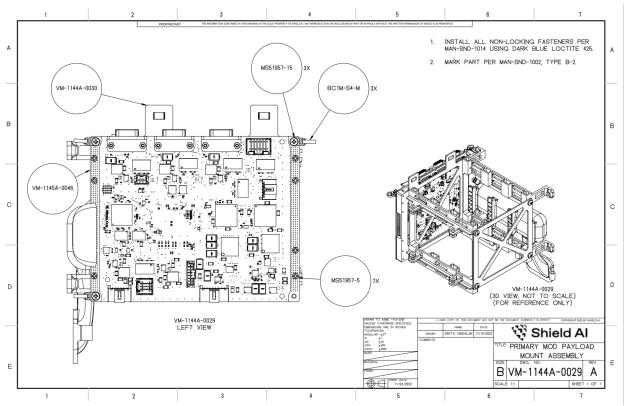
V-BAT Primary Mount Assembly Drawing
